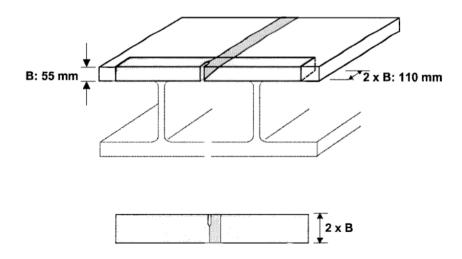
Position and dimensions of CTOD specimens in the butt weld assemblies. Notch positions: weld metal, GCHAZ, ICHAZ
